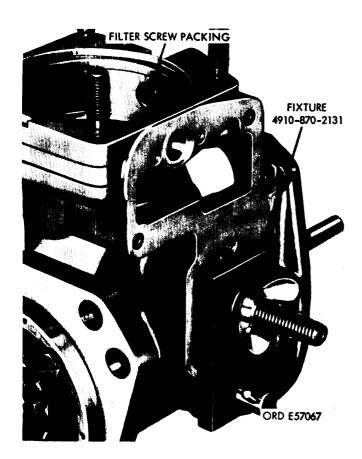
Removing fixture -4910-870-2131 prior to removal of tappet assembly.
